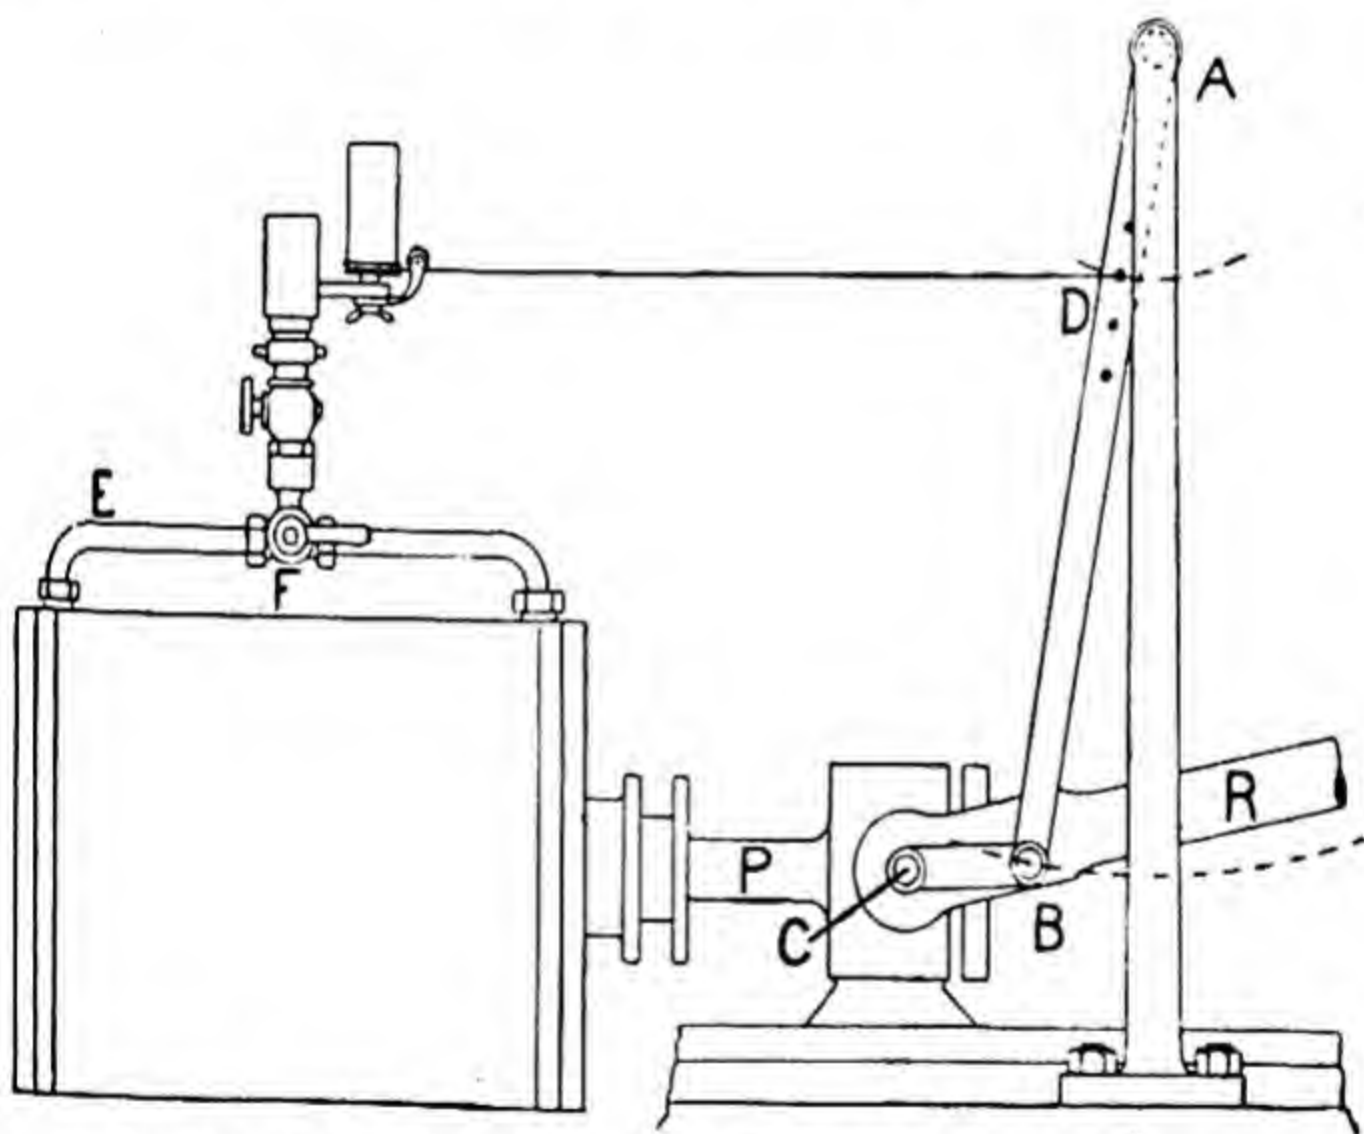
Arrangement for connecting up and driving an indicator on a steam engine.
